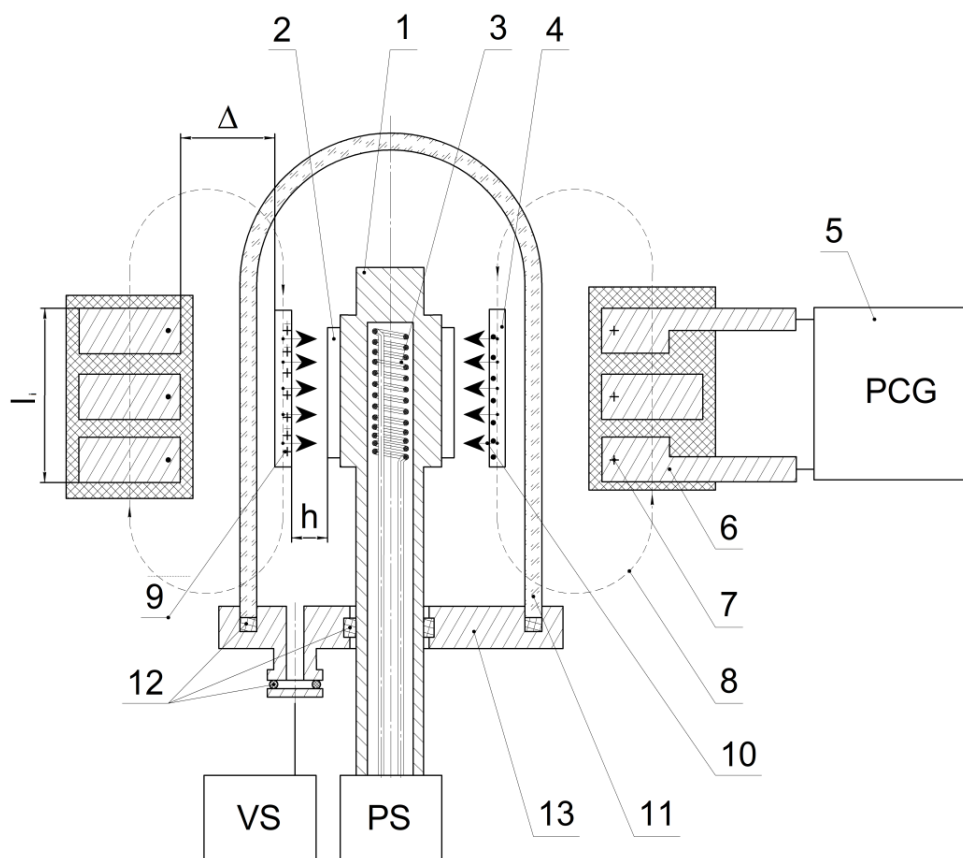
Structure diagram of a device for pulse diffusion welding in a vacuum:
